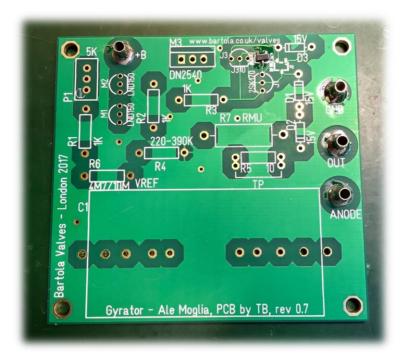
Build step 1: soldering J2 or J4 SMD FET. (BSH111BK soldered in J4 pads)
